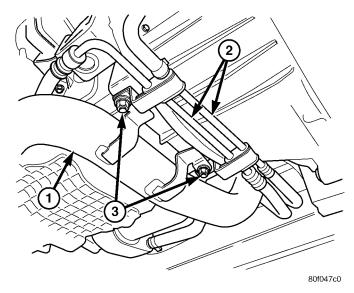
POWER STEERING LINE MOUNTING - 2.4L TURBO
